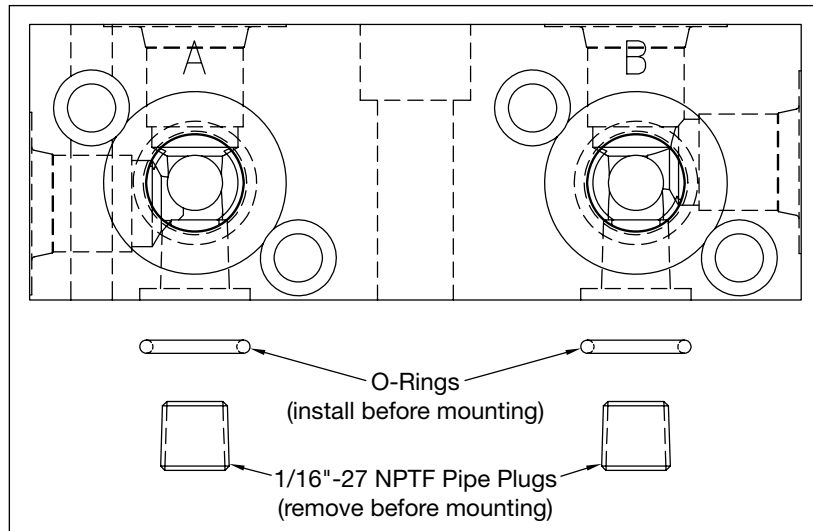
, Manifold Mounting the MCRC21 or MCR21 Receiver
